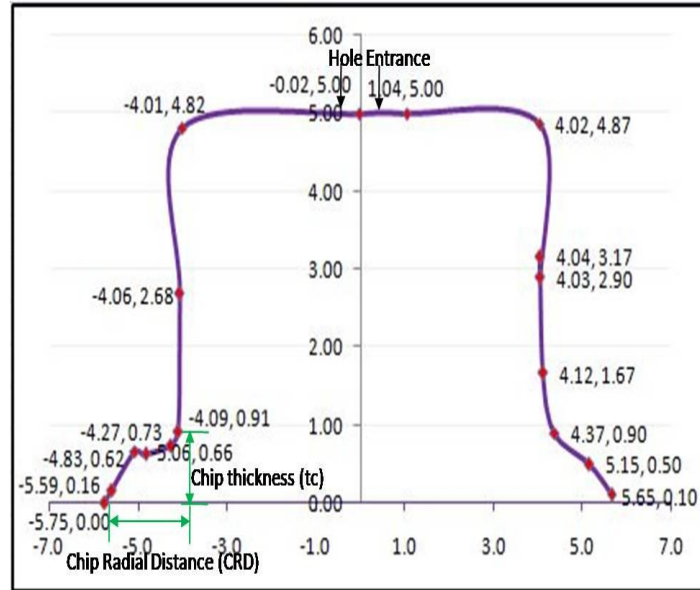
CMM image of machined rod which is drilled by RUD process: Depicting of chipping (CRD and t_c) measurements
